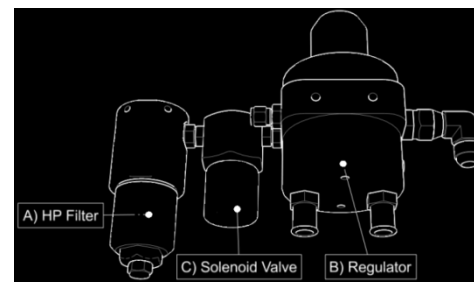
HP Filter, Solenoid, Regulator Subassembly
